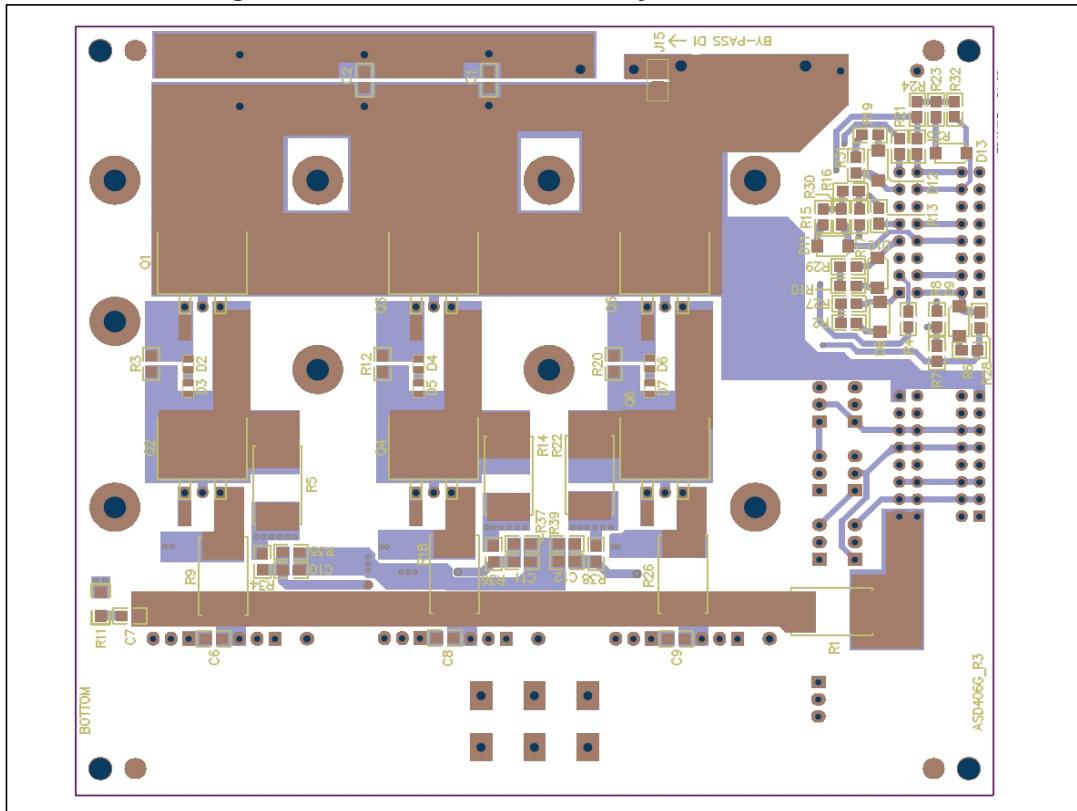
Gate driver board - PCB Layout – Bottom view
